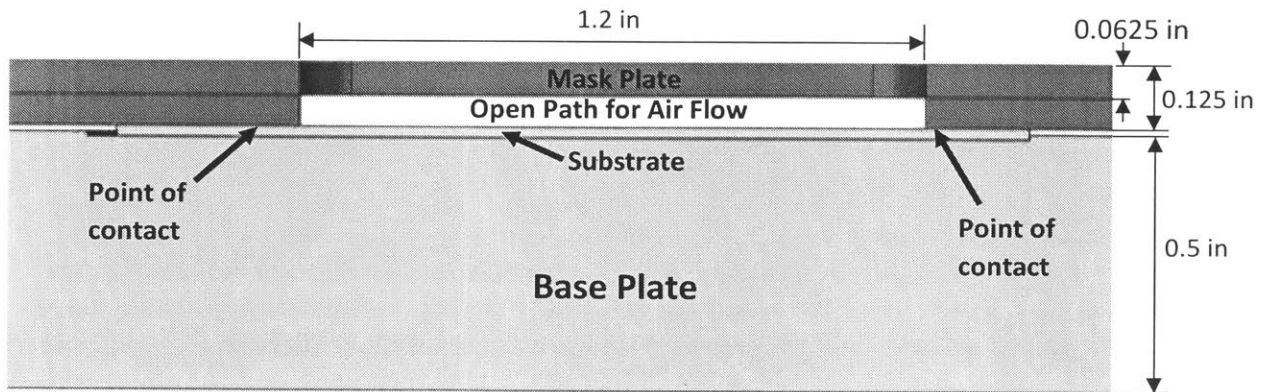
Cross-section of base plate, substrate, and mask assembly through one of the quarter wafer substrate pieces.
